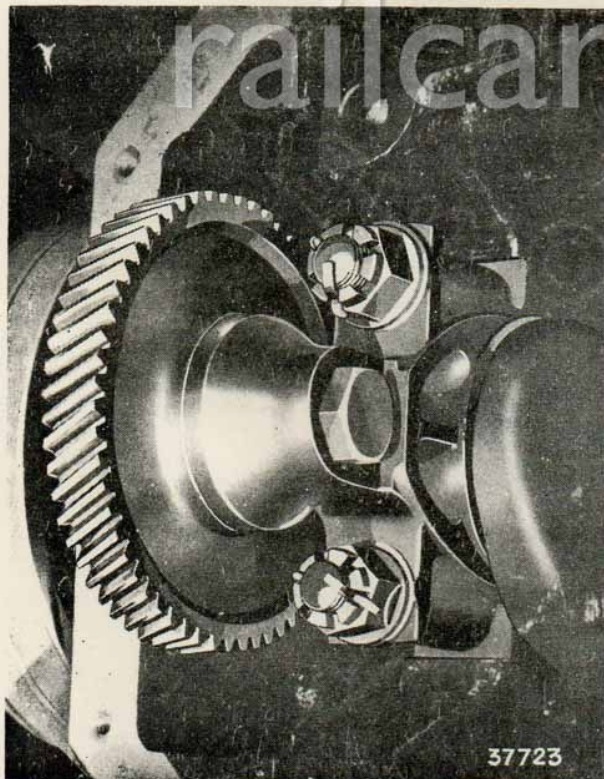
IDLER GEAR FOR COMPRESSOR. AND INJECTION PUMP DRIVE GEAR.
